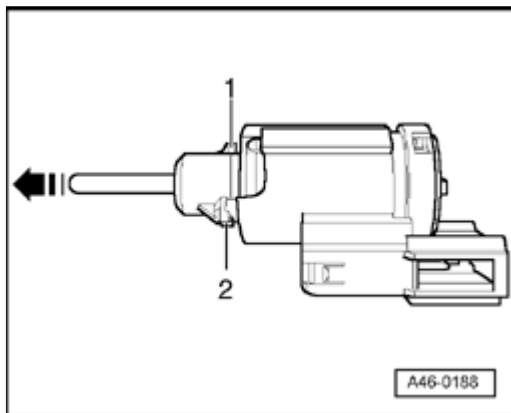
Pulling Out Switch Plunger & Identifying Retainer Tabs On Switch
